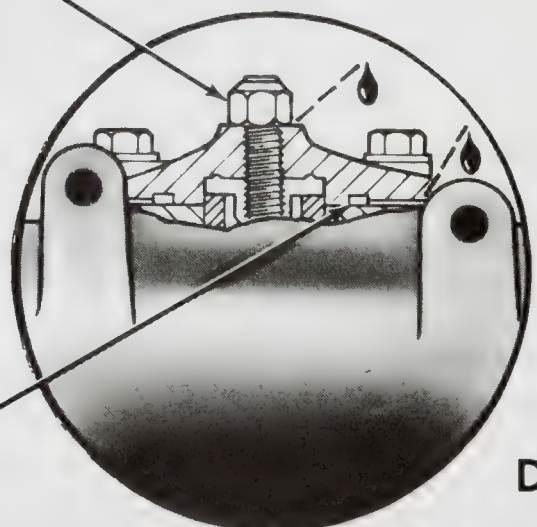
K-6 Steering Gear Leak Diagram (View A)
